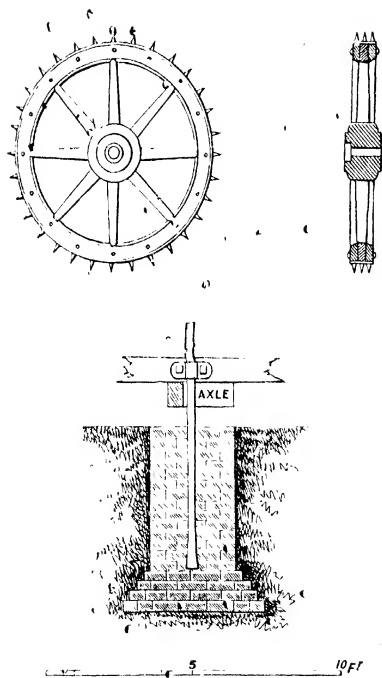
Details of chalk-mill, showing grinding wheel (front view and section), and mode of connecting axle-tree of grinding wheels to the centre shaft.
